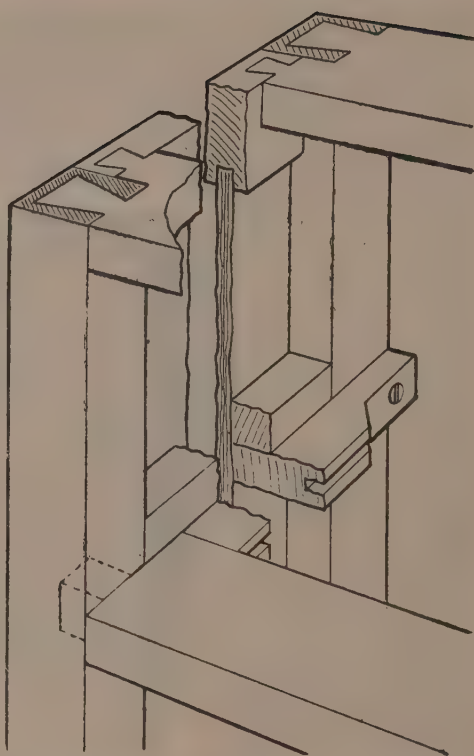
ENLARGED VIEW OF TOP CORNER JOINTS.
